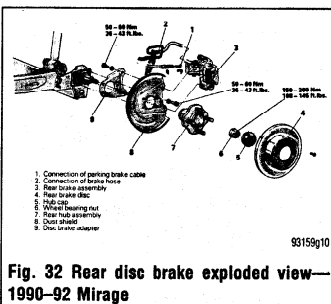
Rear disc brake exploded view—1990-92 Mirage
